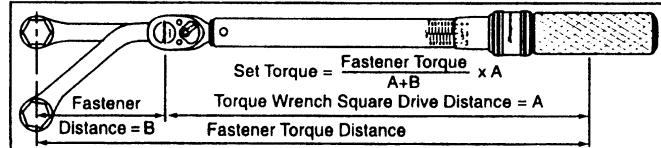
Fastener torque is greater than torque wrench square drive torque.
